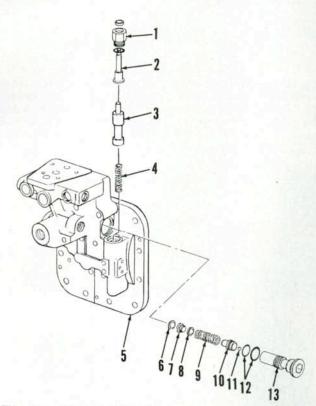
System relief valve pressure setting may be adjusted by means of shims (8) between relief valve cap and spring.
